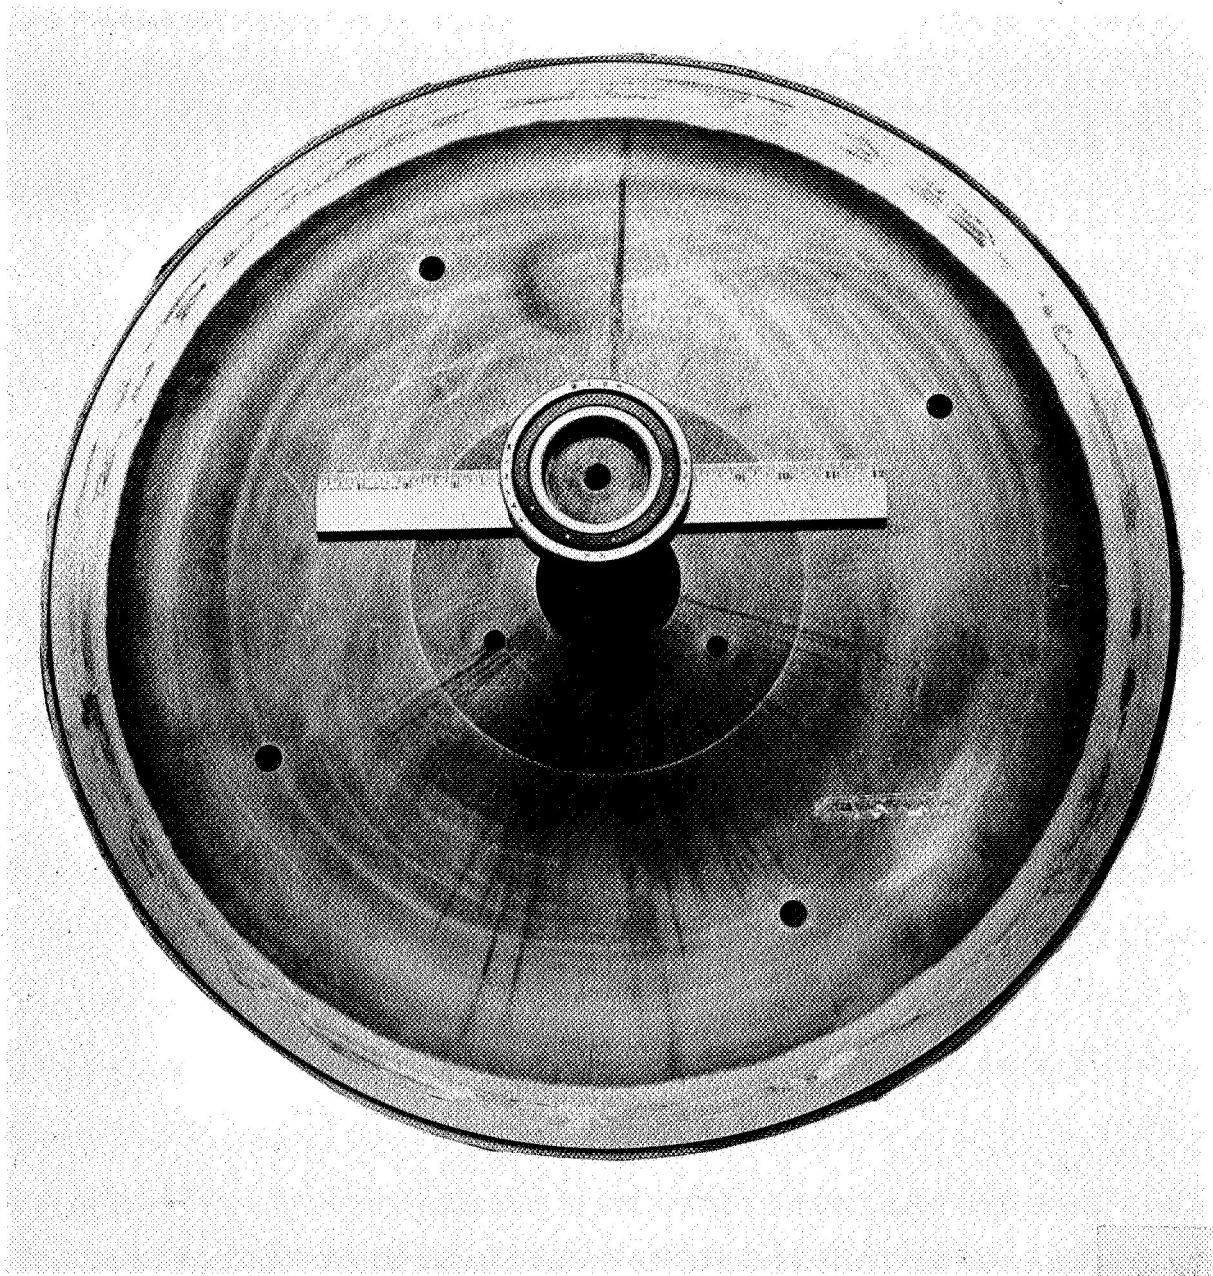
Plating Damage on Air-Bearing Disk Bottom Face (C680313107)
